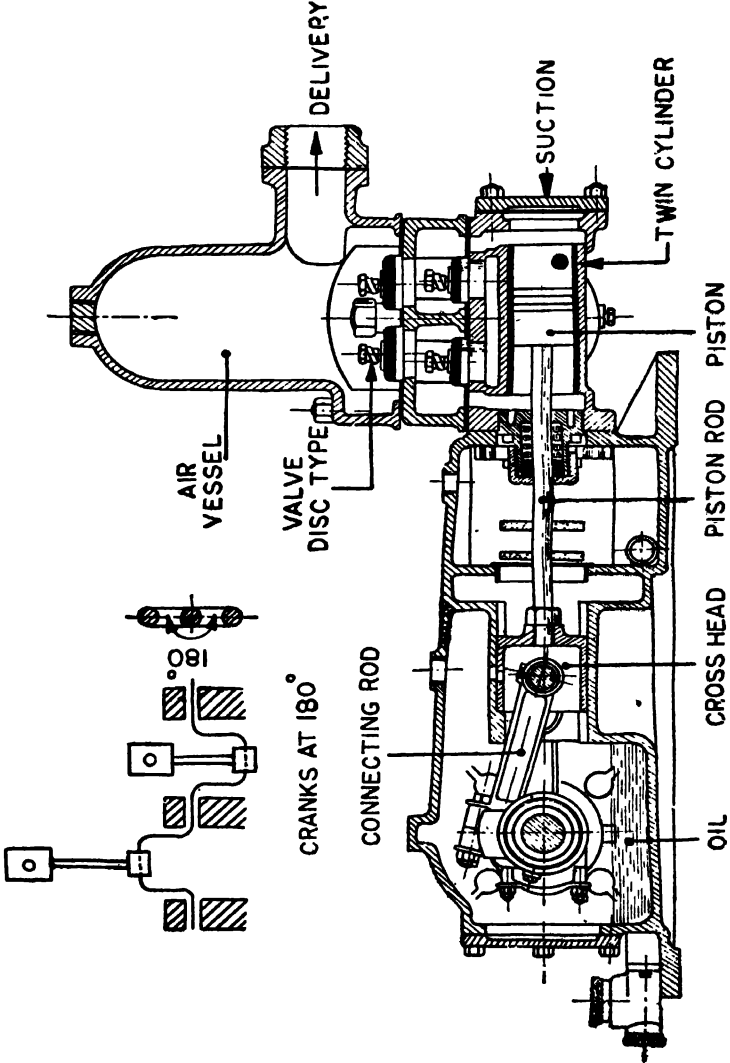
(a) Section Through a Low Speed, Heavy Duty Two-Throw Piston Pump
